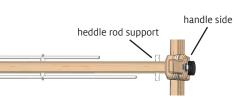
REMOVE ROD SUPPORT ON HANDLE SIDE
